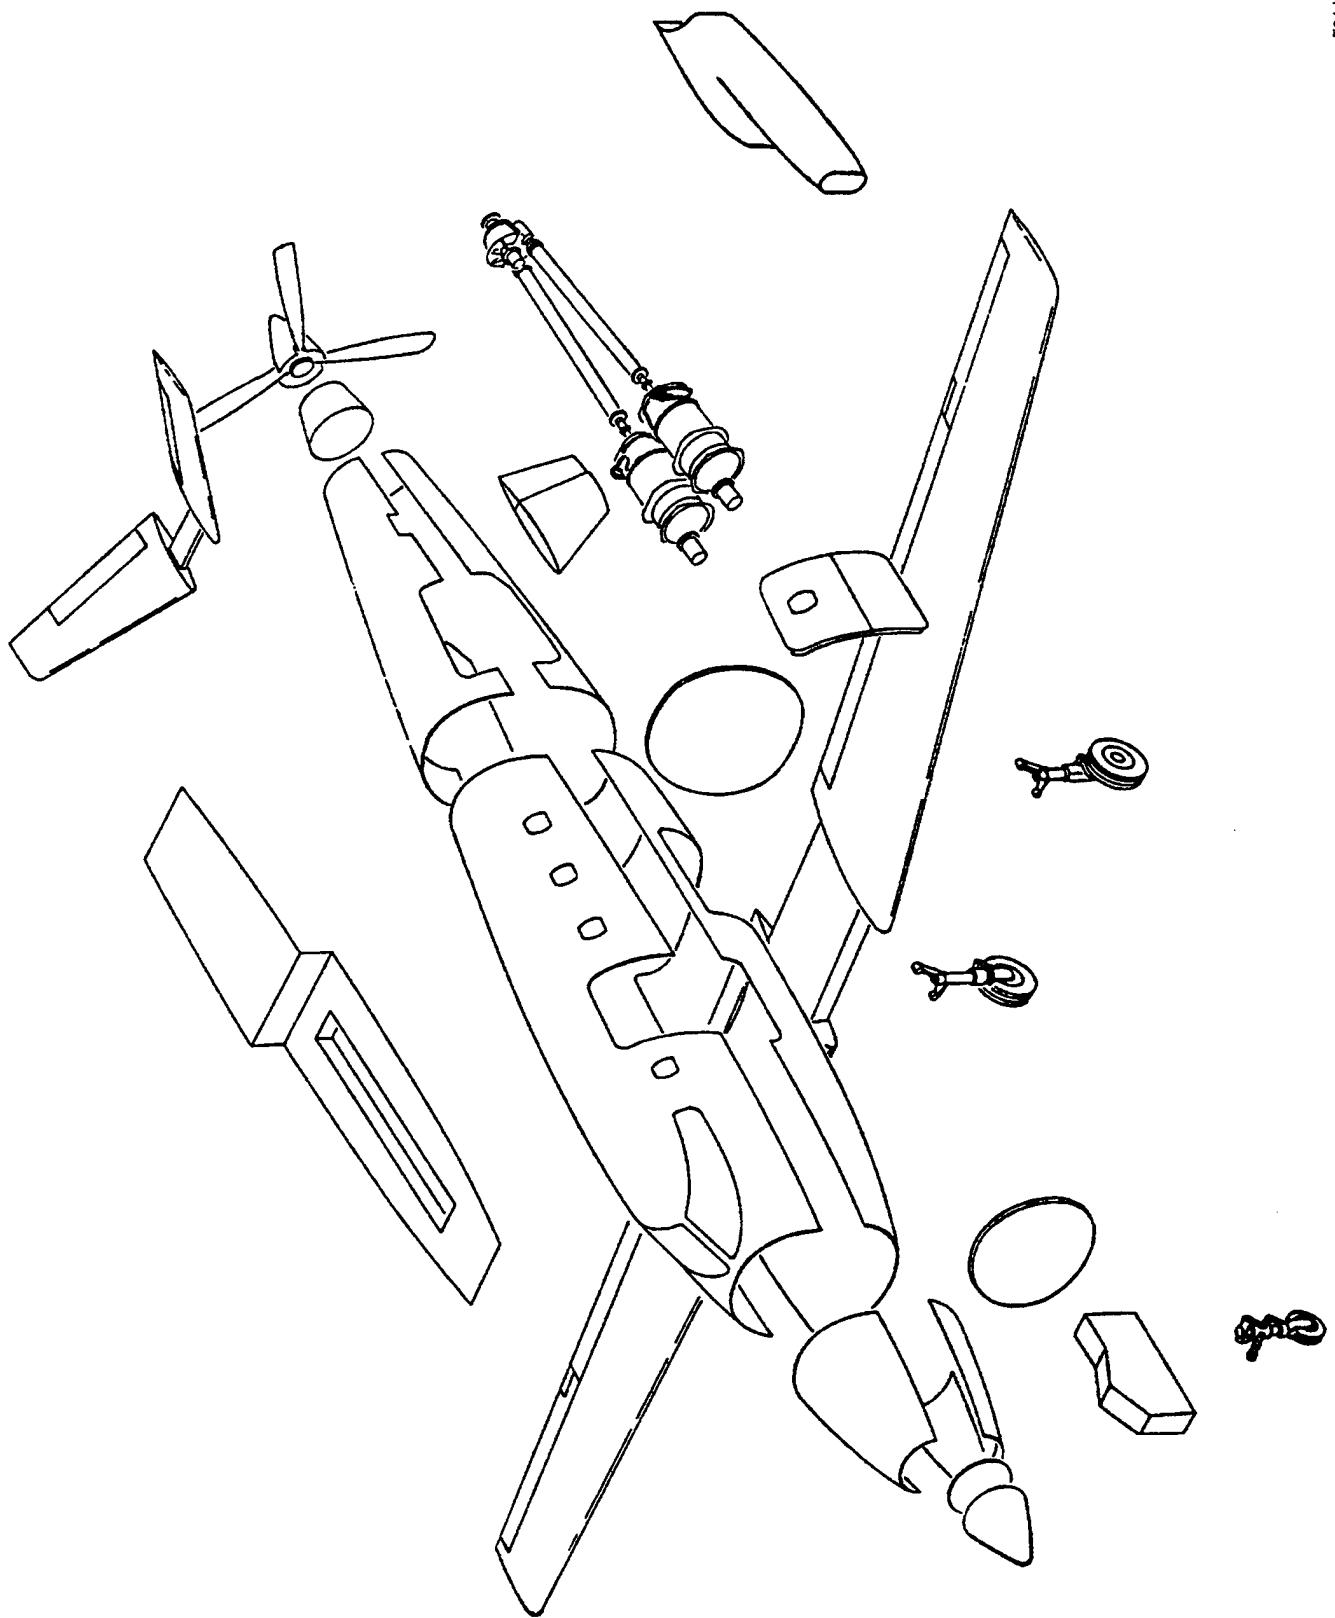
MAJOR ASSEMBLY BREAKDOWN.
